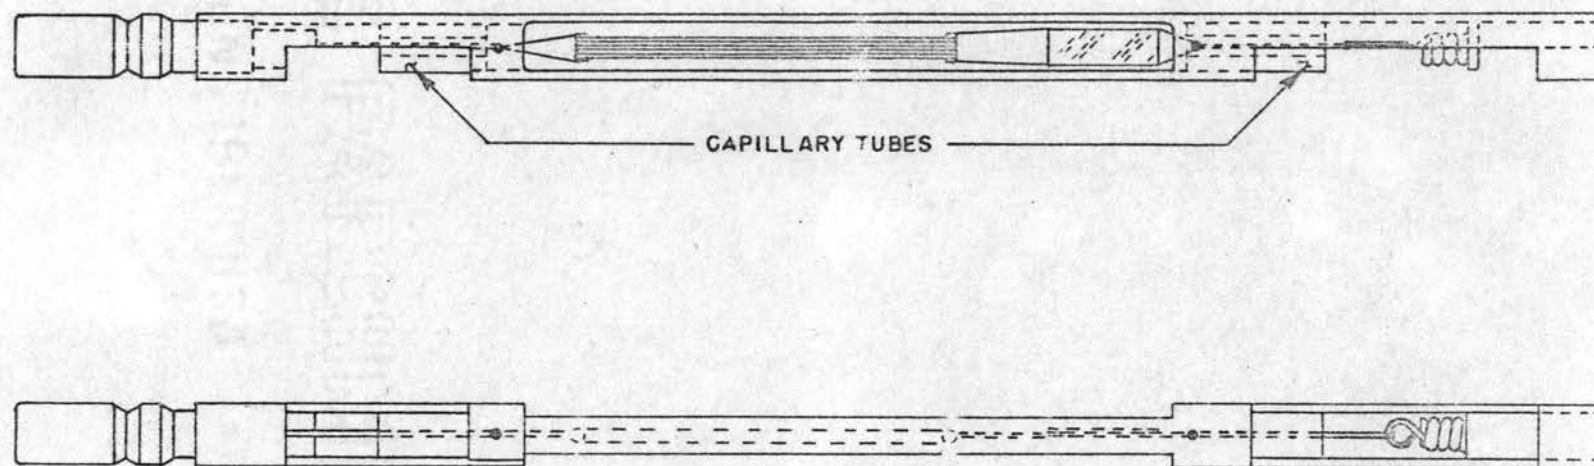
Two-Capillary Tube Coil and Frame Assembly of The Open-Coil Type.
